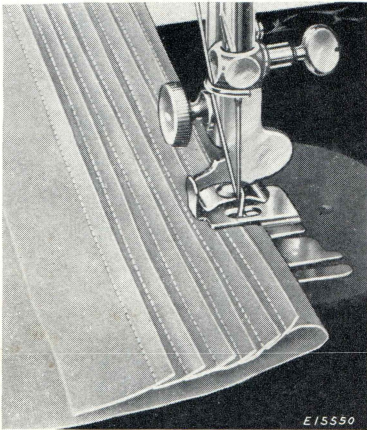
TUCKING WITH THE EDGE-STITCHER
